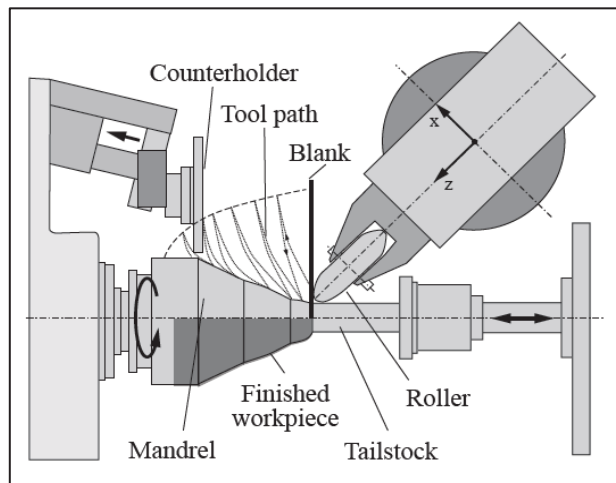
Principle of conventional spinning, showing a rotating blank clamped against a mandrel and formed locally by a tool
